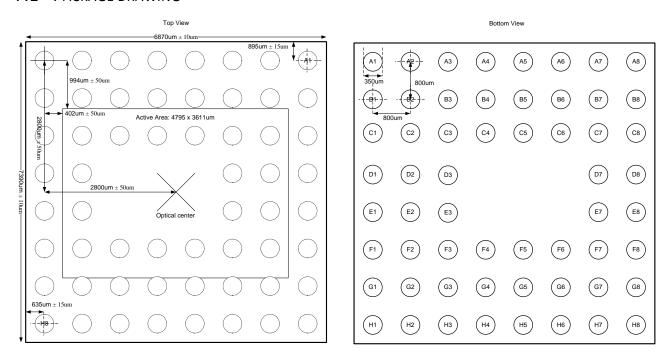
PACKAGE DRAWING OF THE CMV300. ALL DISTANCES IN μM
